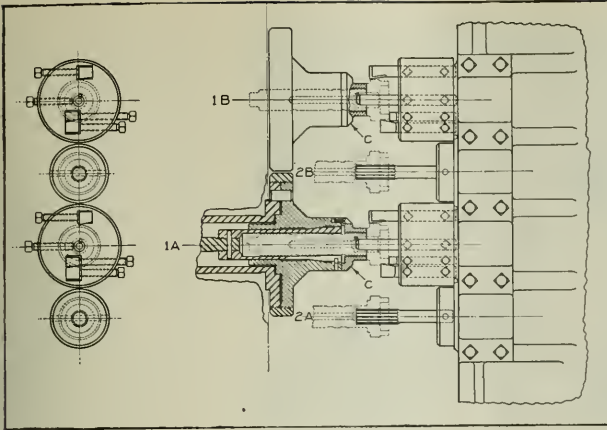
Equipment provided on a Double-spindle Production Lathe for machining Transmission Clutch Shaft
